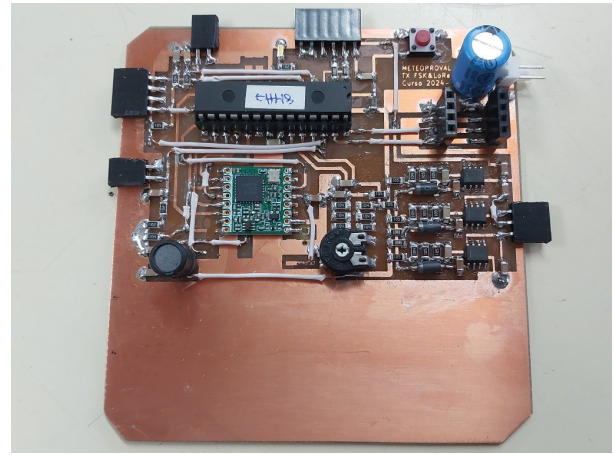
First prototype of the transmitter/receiver board made at the school.
